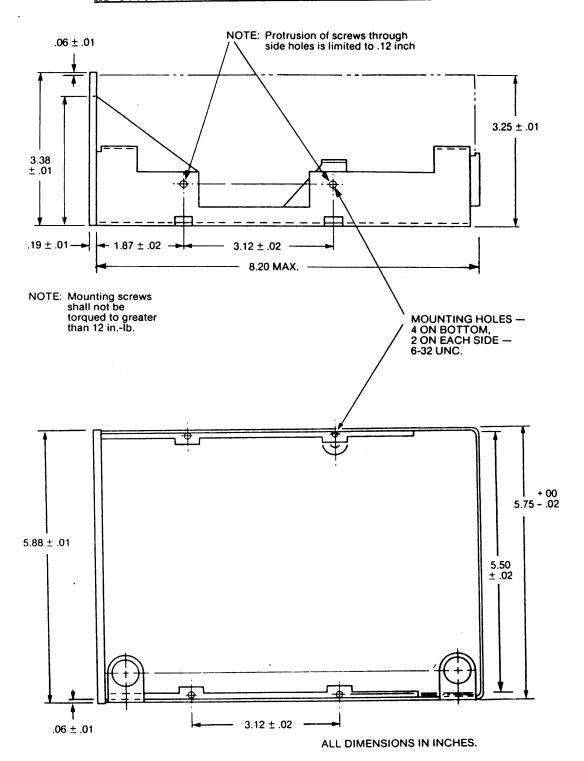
XT-3000 Mechanical Outline Bottom and Side Views
